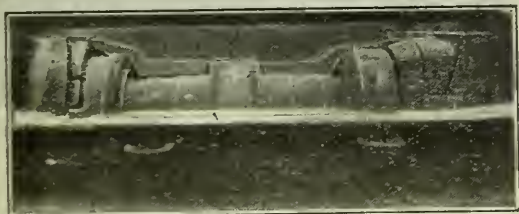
SHOWING TWO HALF TURBINE CYLINDERS MOULDED TOGETHER IN ONE BOX.
